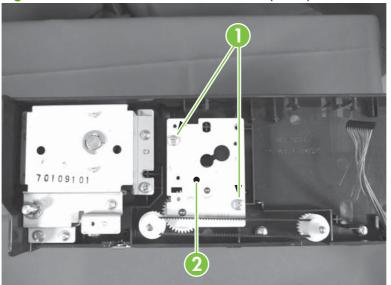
Remove the left belt-drive unit (2 of 3)
